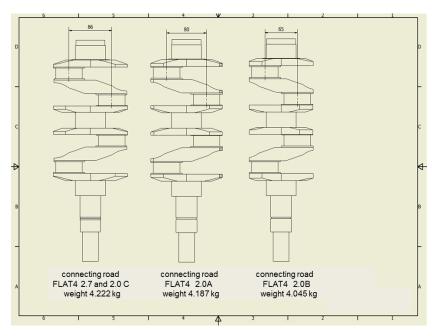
A simplified geometrical drawing of connecting rod Subaru Flat4 engine for all options
